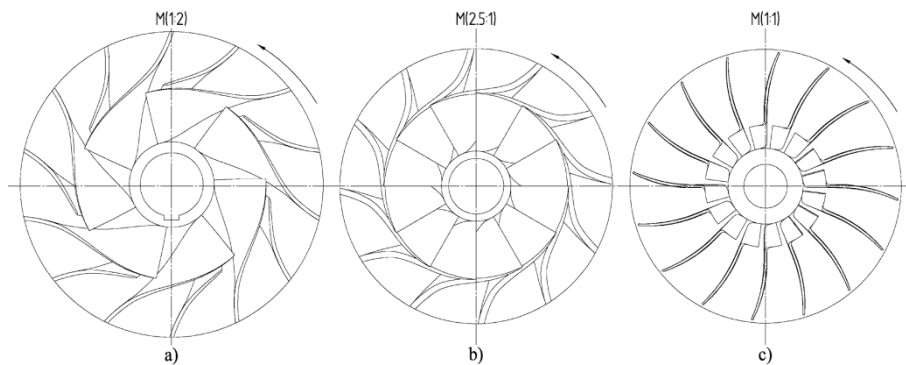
The investigated impellers: a) Industrial use; b) Turbocharger b) Turboexpander
